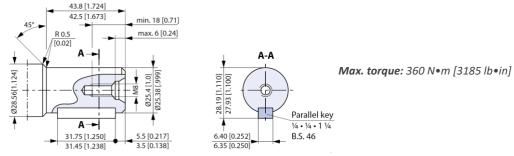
OMP shaft version: Cylindrical shaft 1 in; Parallel key B.S. 46
